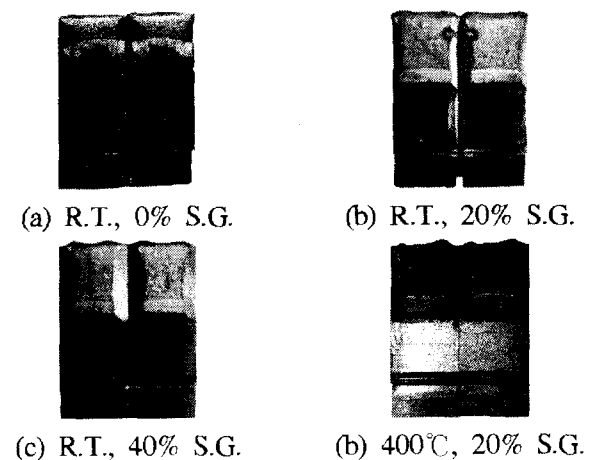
Fracture surfaces of 1CT specimen for  $J_{ic}$  test
